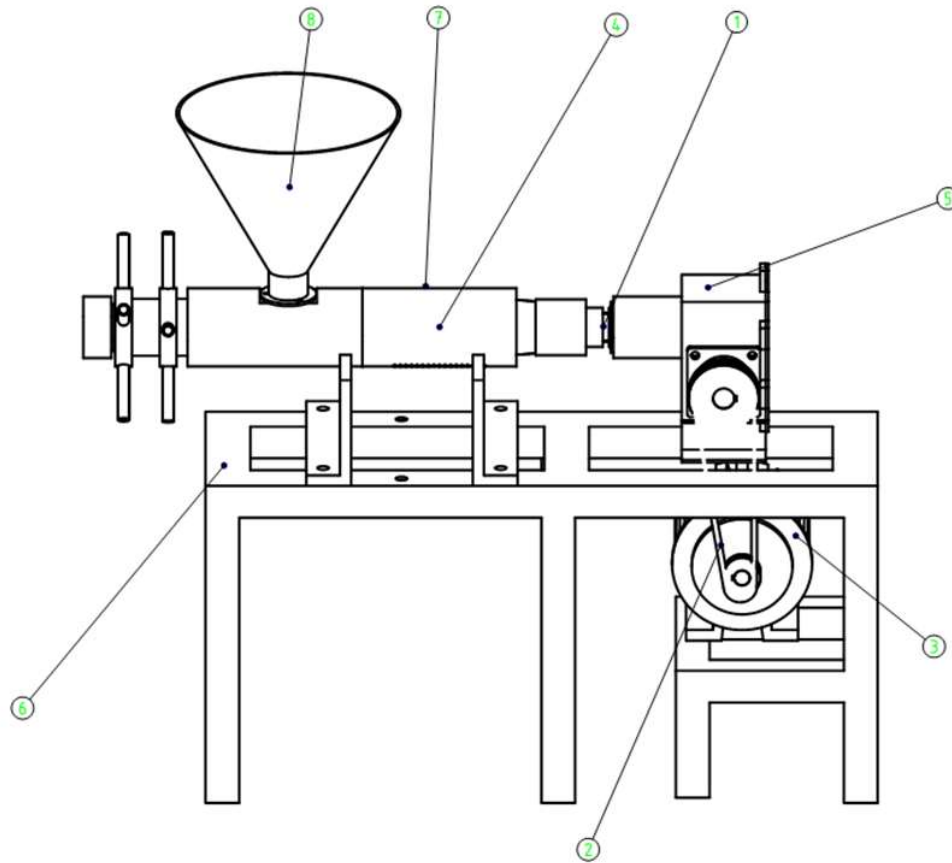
Cashew Nut Shell Oil Extraction Machine
